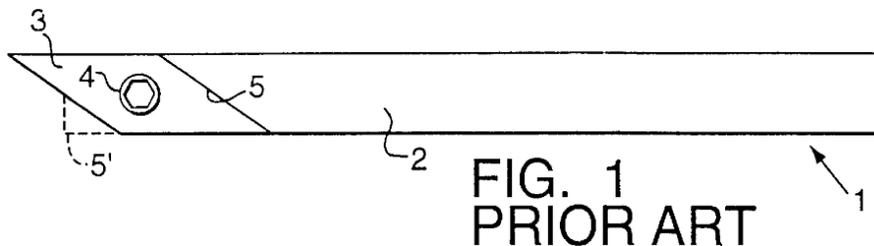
shows a prior art small-shank tool. The cutting tool 1 in Fig. 1 includes a rectangular-shaped shank 2 having a width of 8 mm, and a rhomboidal-shaped insert 3. The tool insert 3 is defined by an inscribed circle (not illustrated), which is approximately equal to the width of the shank. The shank defines a single tool-supporting edge 5 for engaging and supporting a corresponding edge of the tool insert. One of the problems is that if the insert is torqued in the clockwise direction, the tool insert may become relatively easily dislodged on the shank. It is stated that industry has attempted to overcome this problem by providing another smaller supporting edge 5' on the opposite side of the tool insert relative to the first supporting edge 5. However, because of the size and location of the second supporting edge, it provides little additional support and has proven to break away relatively easily.
